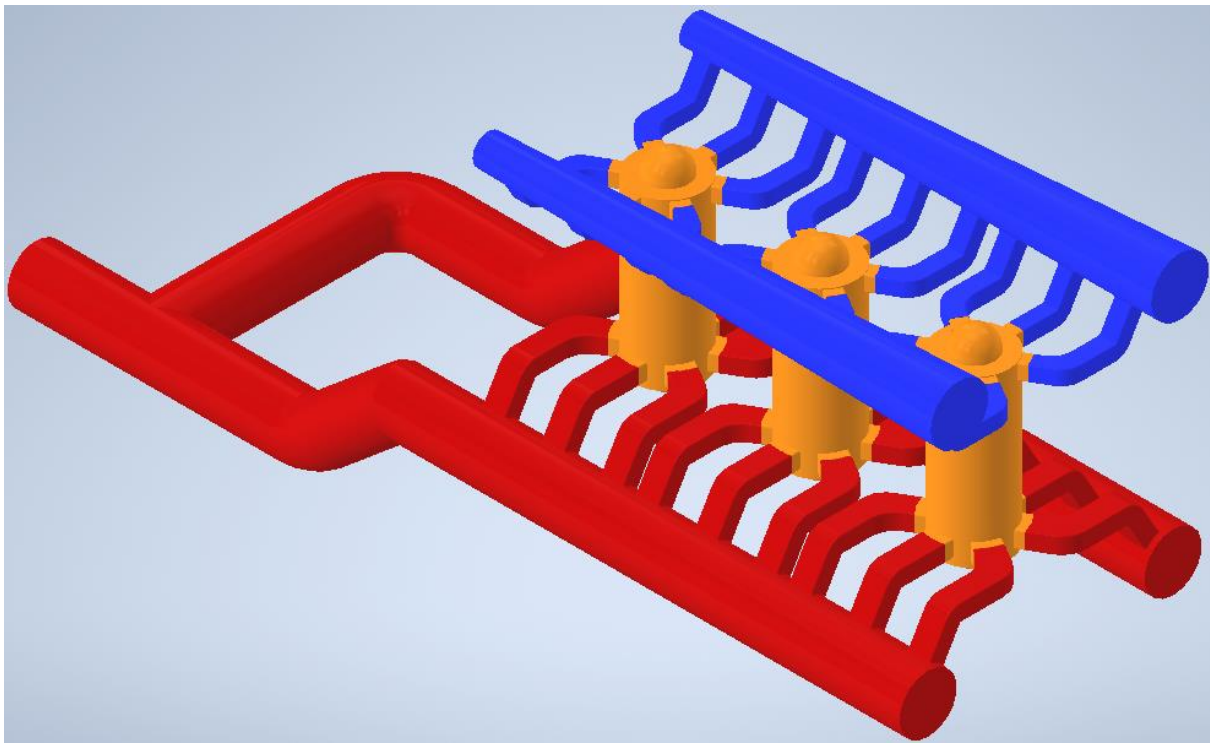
CAD model for the tapered manifold opposed piston engine
